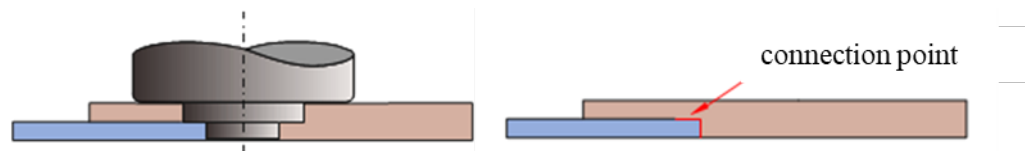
Combined lap and butt joint; left: with welding tool, right: connection point [1].
